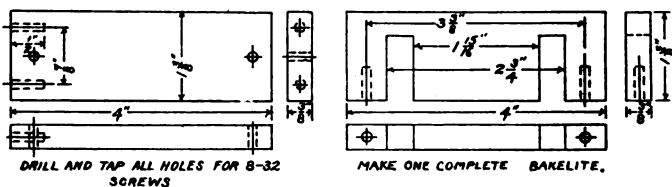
Dimensions of Bracket for Mounting Honeycomb Coil.
